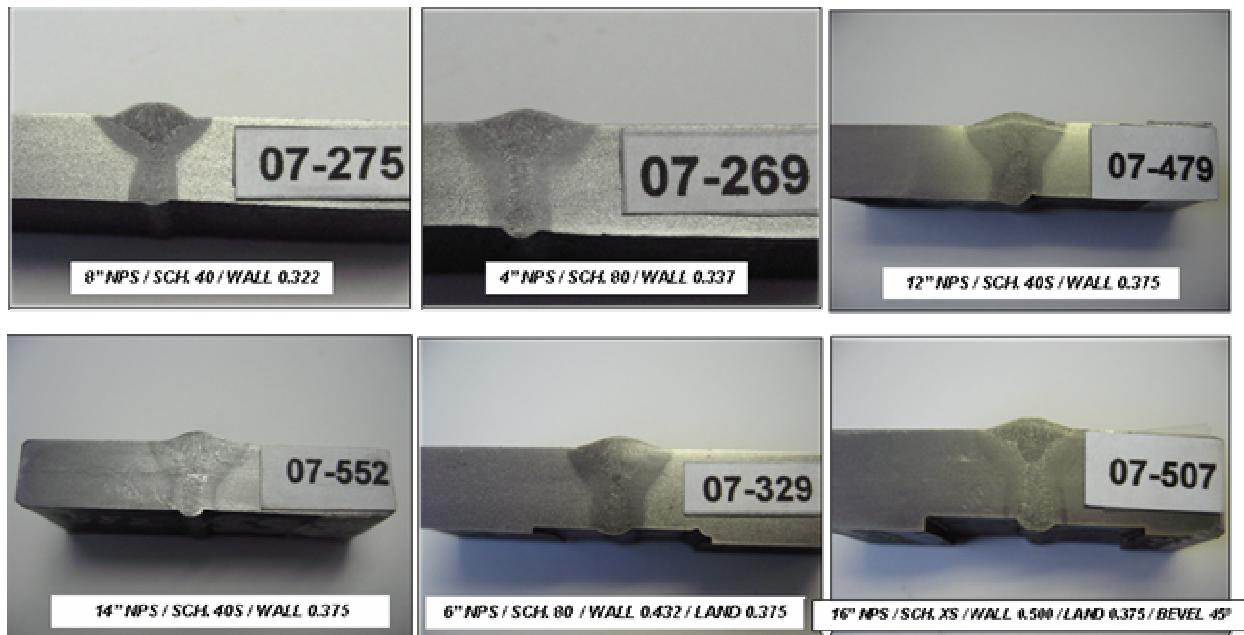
Macro cross sections of hybrid pipe welds produced at NASSCO shipyard.
